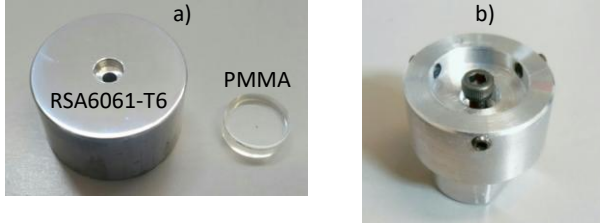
a) RSA6061-T6 and PMMA sample used in the cutting tests; b) Fixture for micro-milling of PMMA samples.
